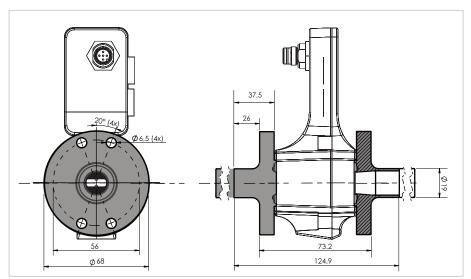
Flange according DIN 11850 row 2 / DIN 11866 row / EN 10357 Serie A
